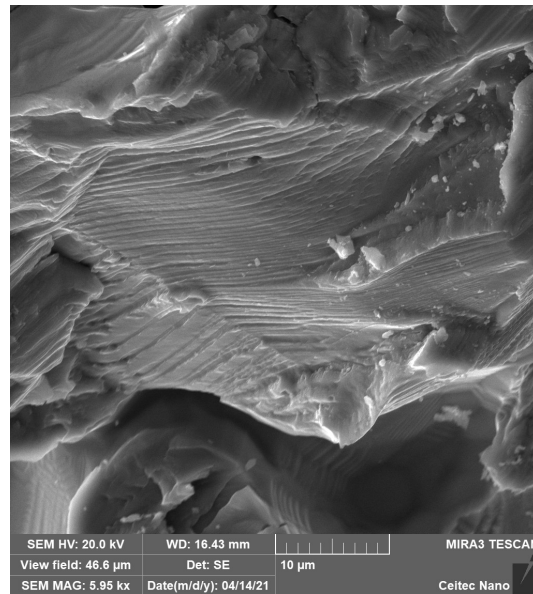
Morphological patterns on the fracture surface with fatigue striations.
